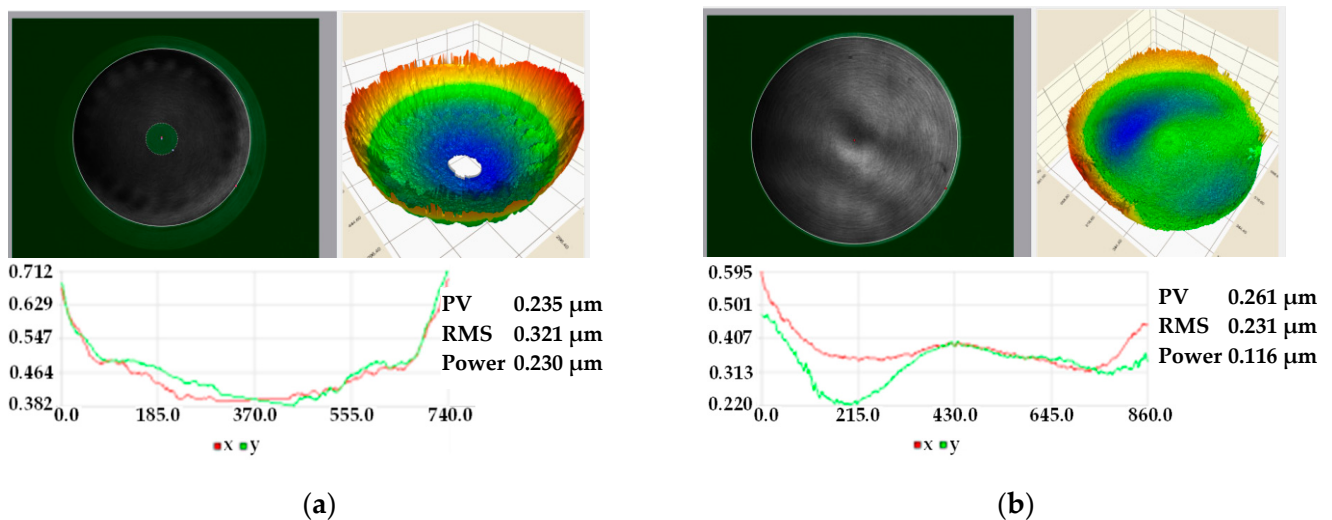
Initial shape of ceramic plates: (a) Initial shape of upper ceramic plate; (b) Initial shape of lower ceramic plate.
